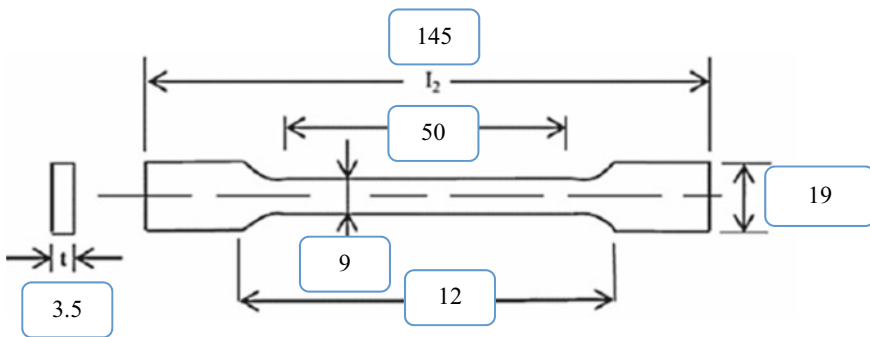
The size of tensile test specimens. All dimensions are all in mm
